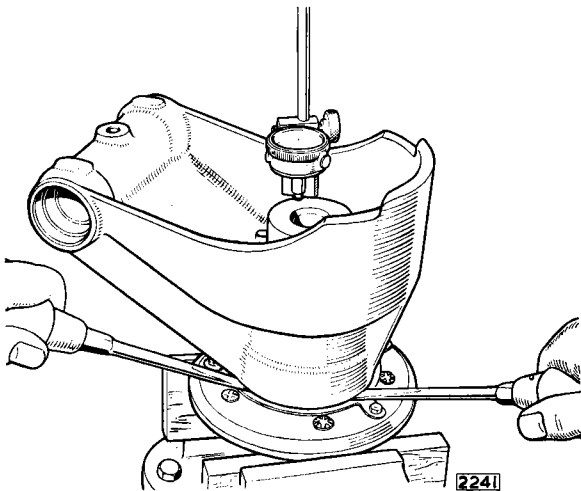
Checking the hub bearing end-float with a dial test indicator (Churchill Tool No. J.13)
